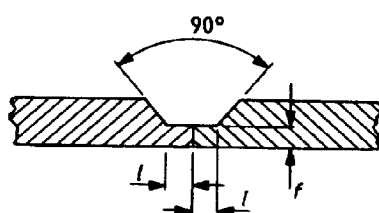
Typical butt joint preparations for use with metal-arc welding, without backing ring
